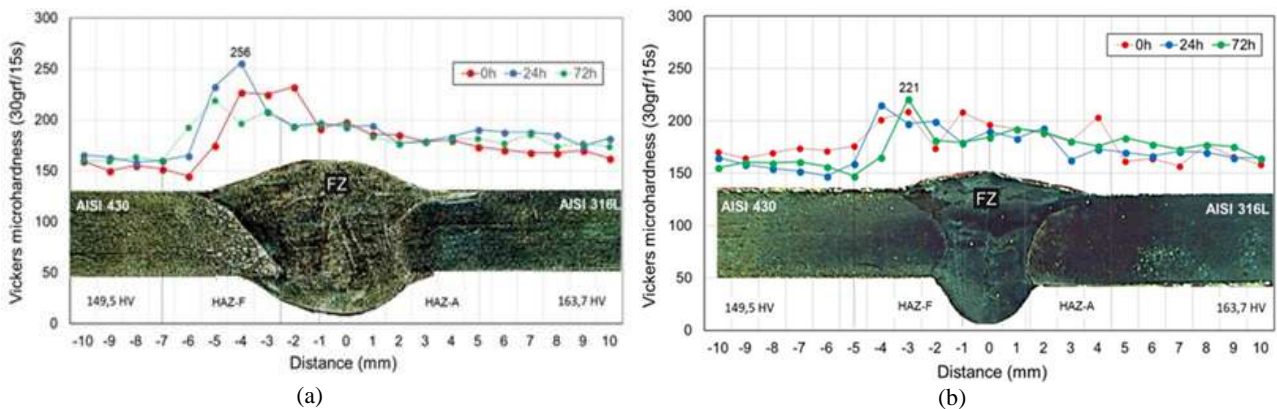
Vickers microhardness profile along the cross-section of welded joints specimens before and after immersion tests. (a) GA specimen, and (b) GB specimen
